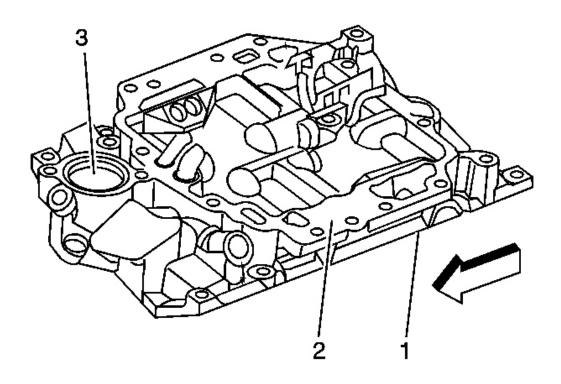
Upper Intake Manifold Damage Courtesy of GENERAL MOTORS CORP.
